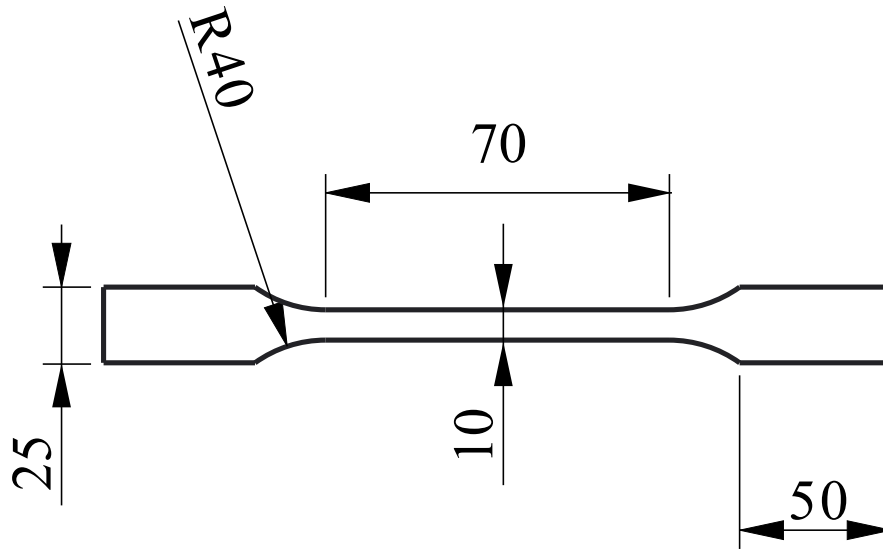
Tensile dogbone specimen (all dimensions in mm)
